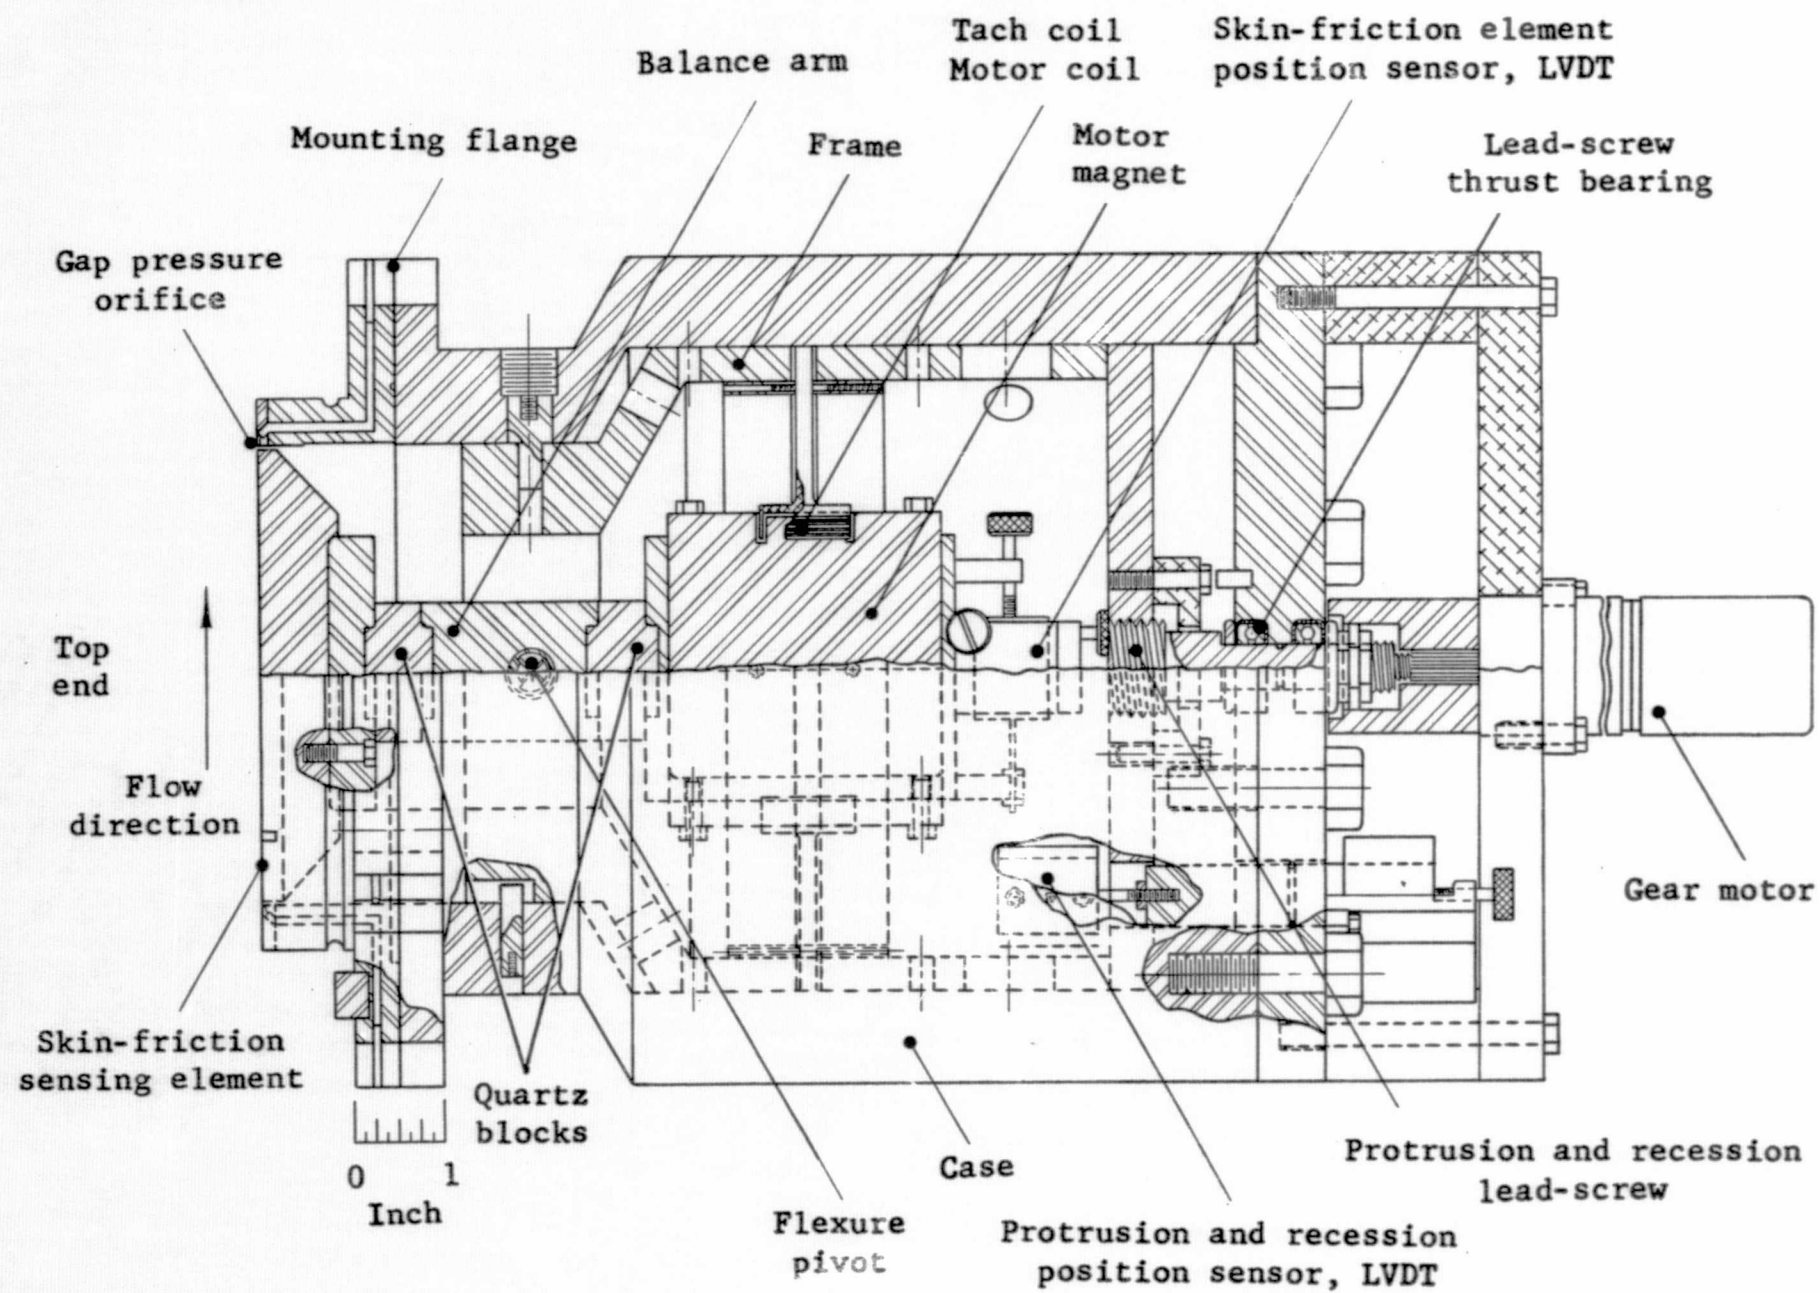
Cutaway assembly drawing of the skin-friction balance.
